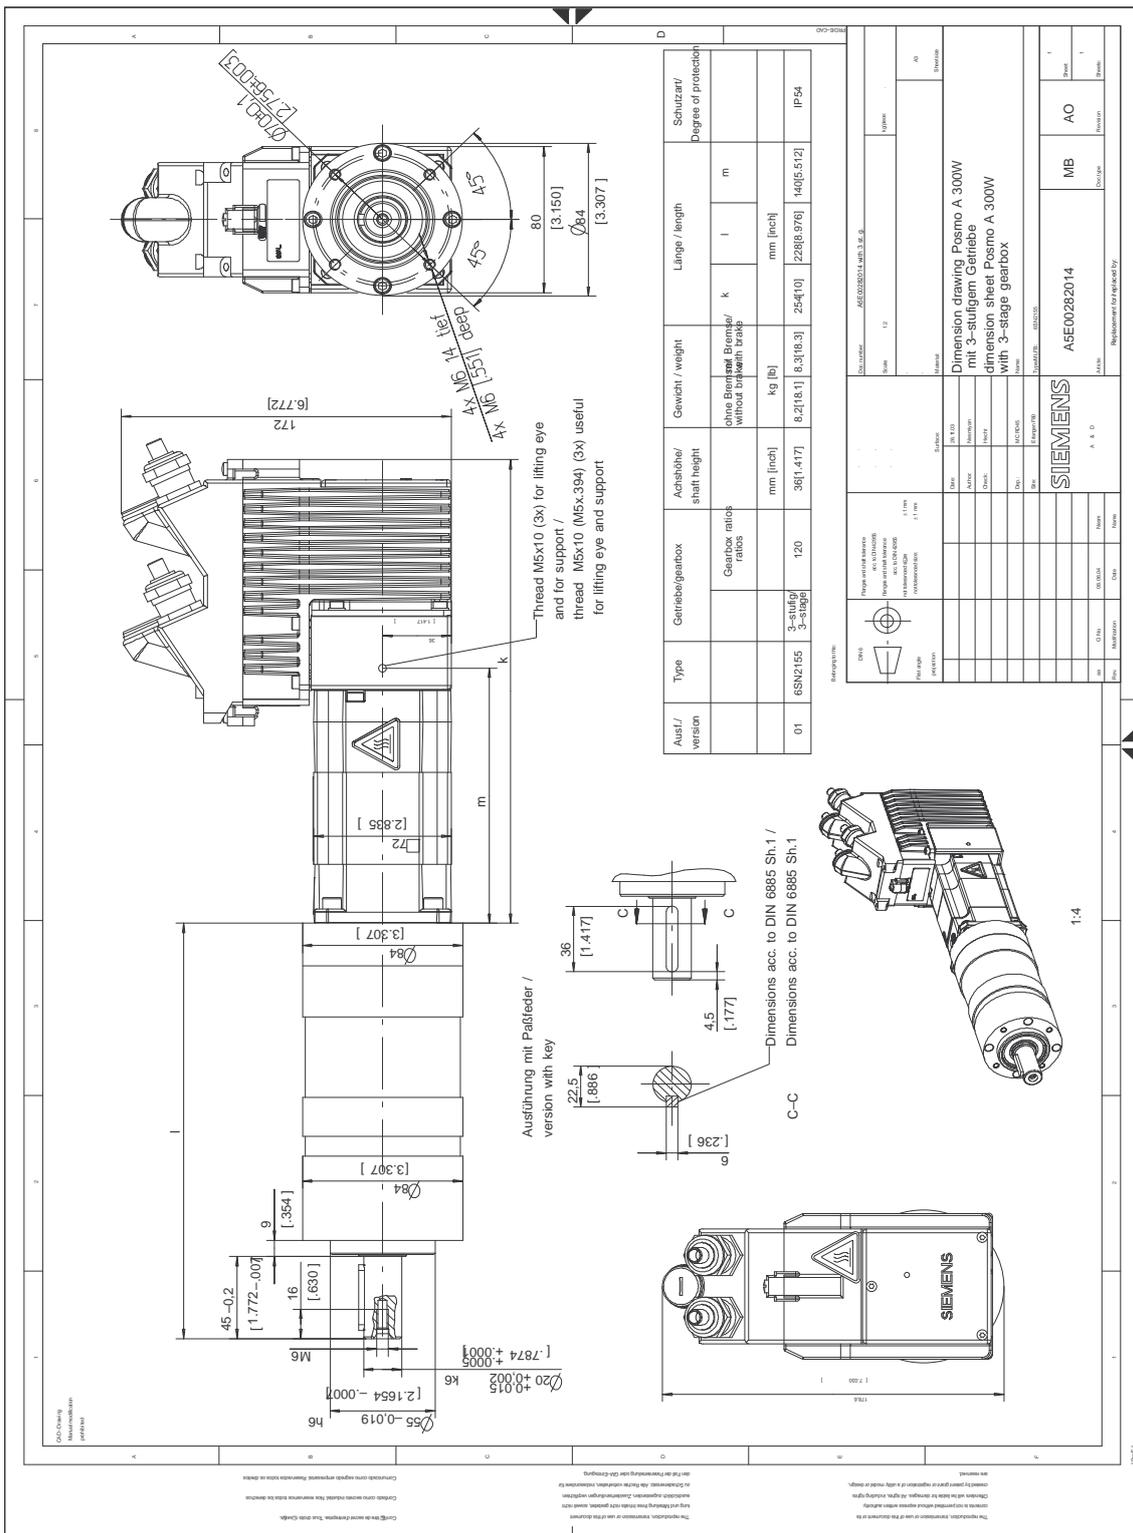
Dimension drawing: SIMODRIVE POSMO A – 300W with planetary gearbox (3-stage)
